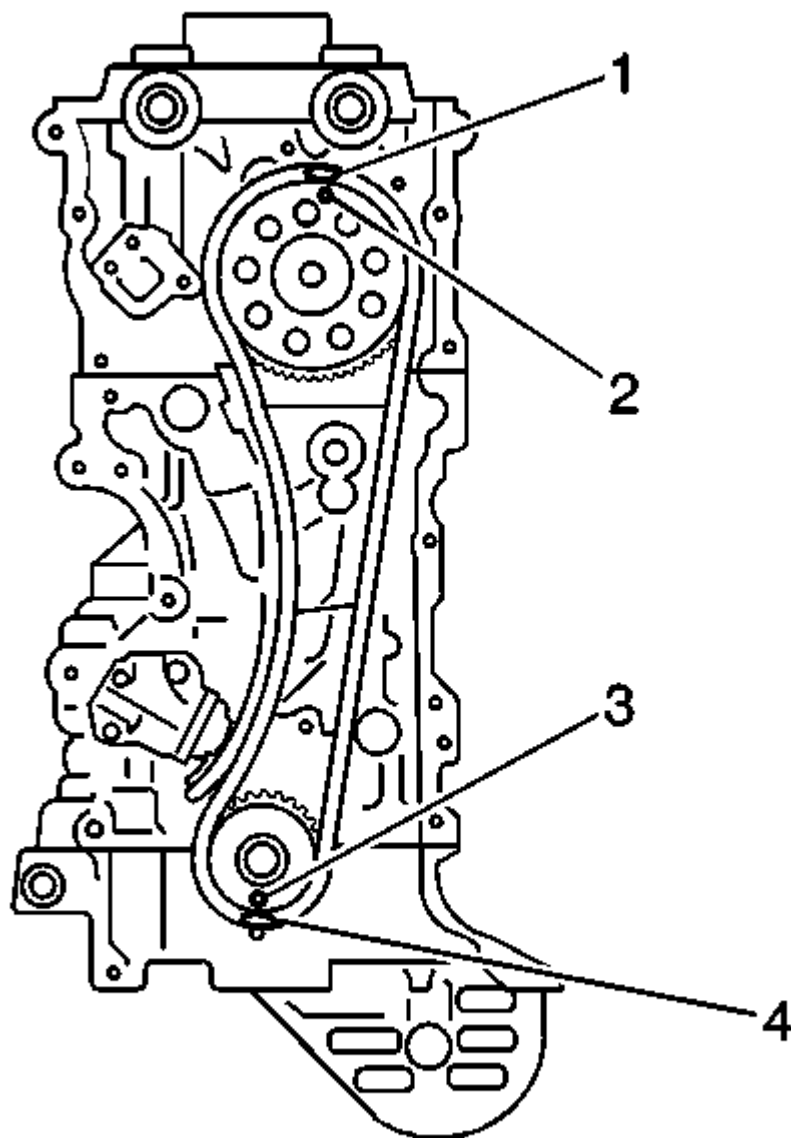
Aligning Yellow Link With Crankshaft Sprocket Mark
